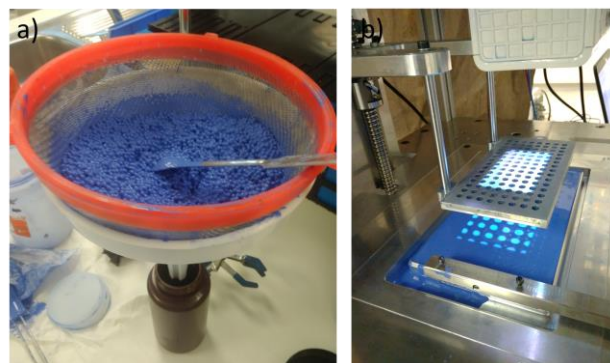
image of a) removal method of the balls out of the LTCC suspension and b) LTCC suspension on the MIP-SLA machine.
